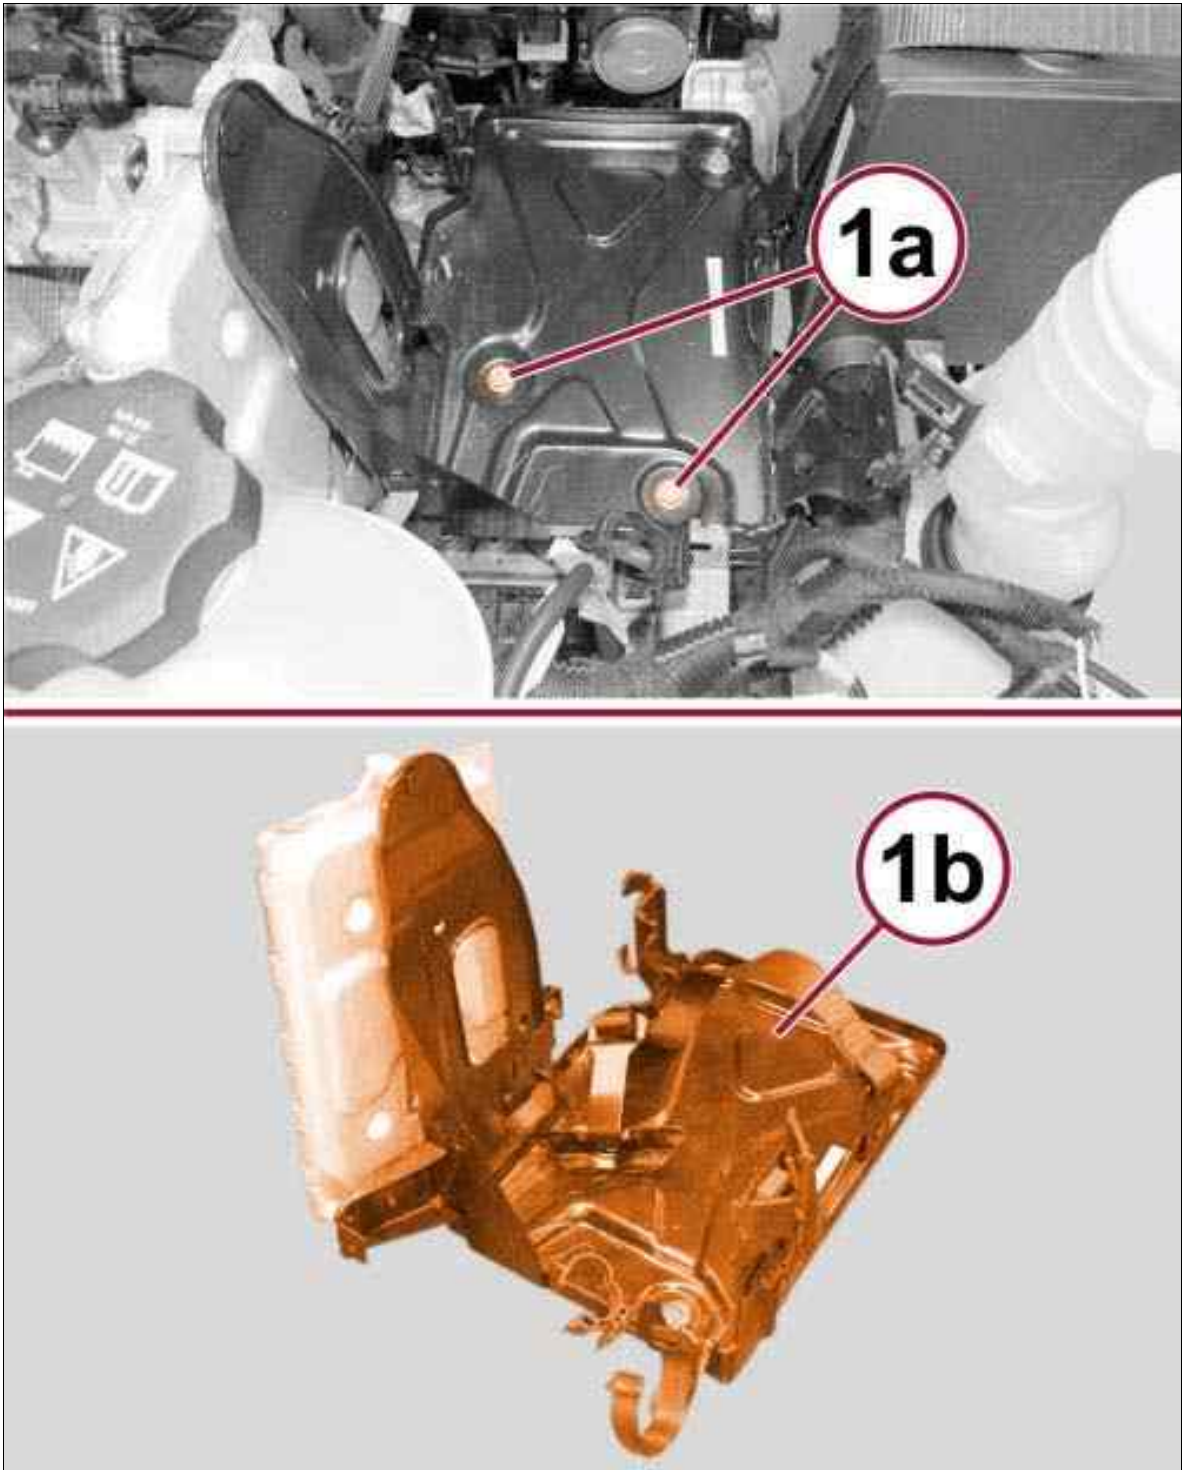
Washer Fluid Assembly, Retaining Clips & Bottom Cover
